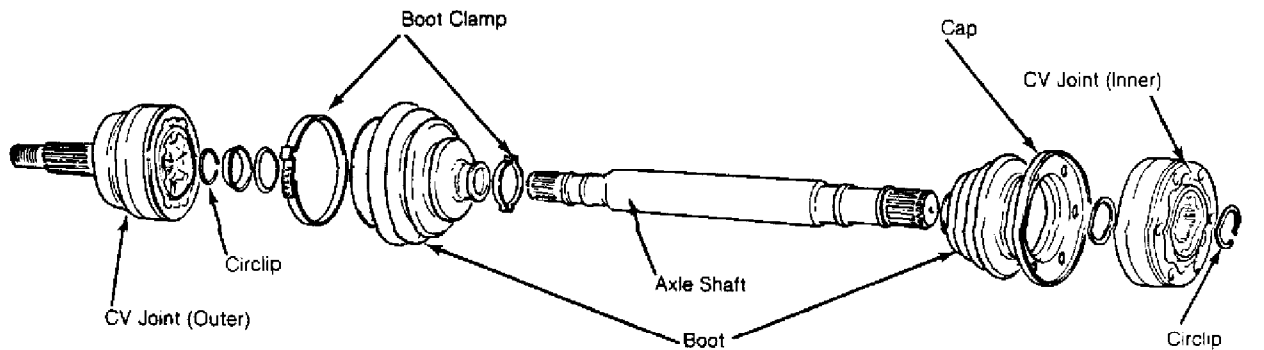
Exploded View of Typical Volkswagen Axle Shaft Assembly
